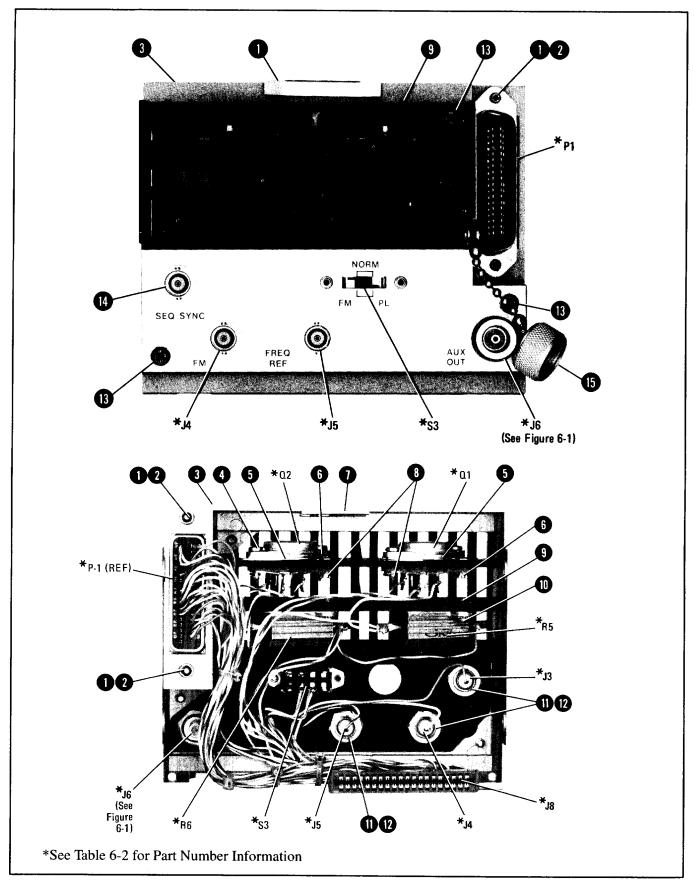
Rear Panel Parts Identification (1 of 4)
